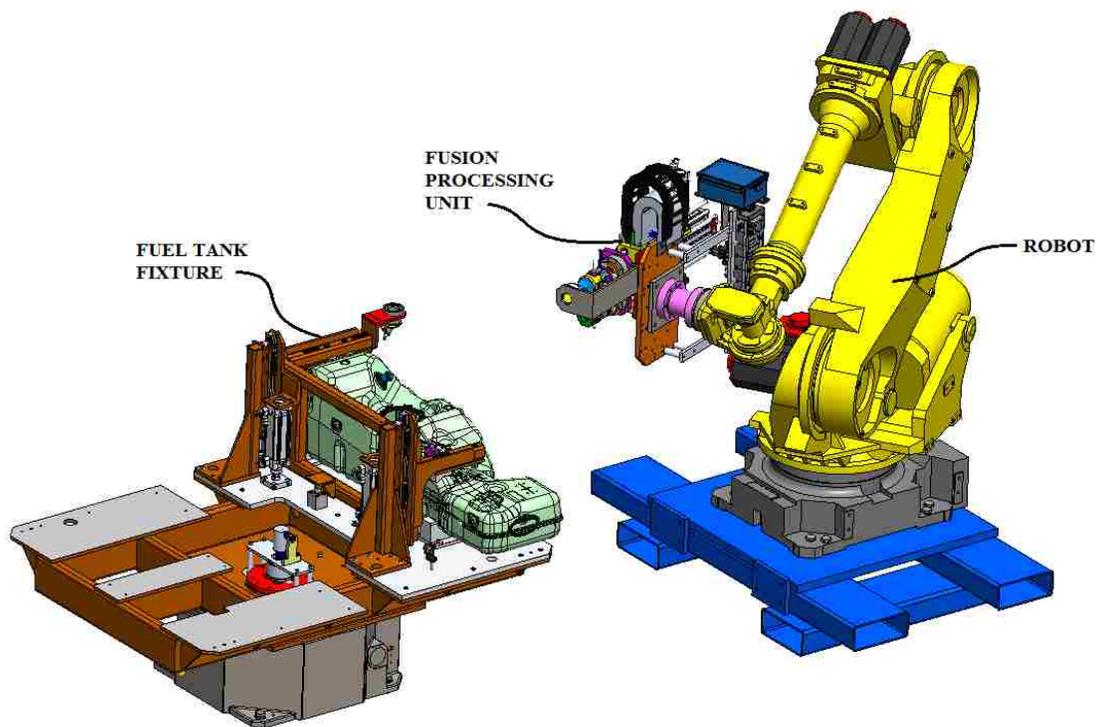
Robot Mounted Fusion Unit Position Relative to the Fuel Tank Fixture
